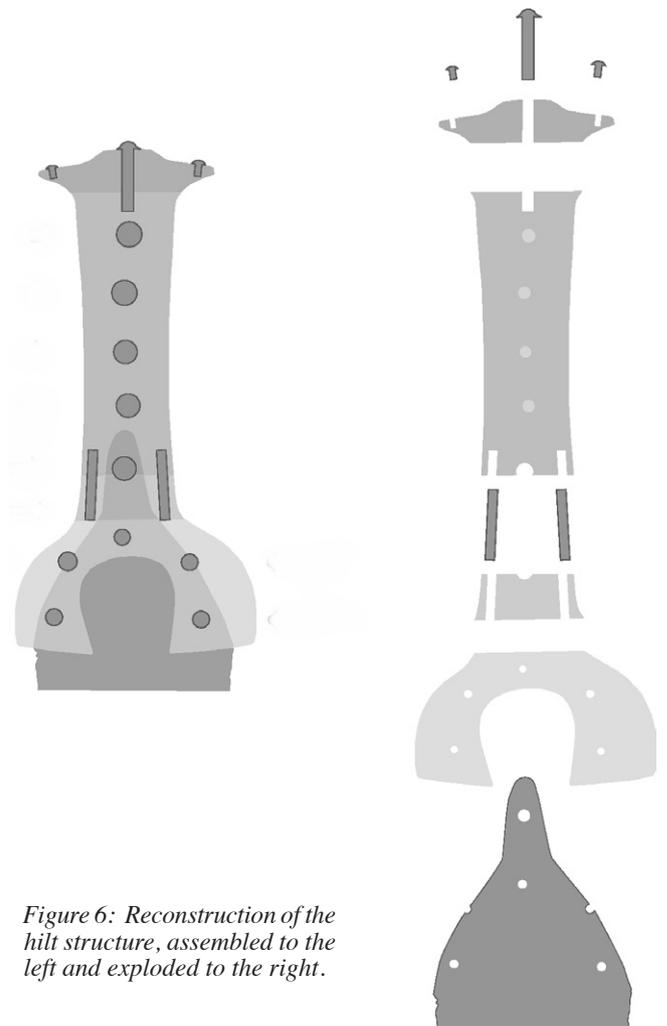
Reconstruction of the hilt structure, assembled to the left and exploded to the right.
